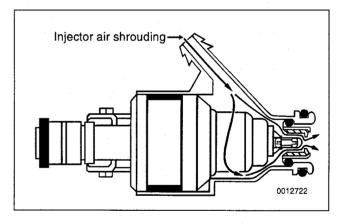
Cutaway view of fuel injector used on M42 or M44 engine.
